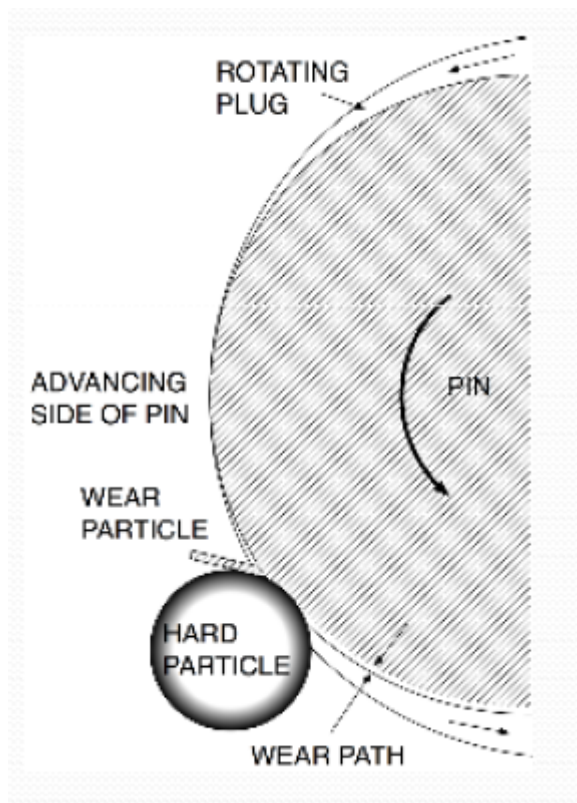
Schematic for rotating plug model of tool wear in friction stir welding of particle-reinforced metal matrix composites (MMCs) [111].
